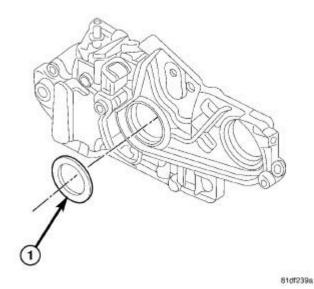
FRONT CRANKSHAFT SEAL Courtesy of CHRYSLER LLC
